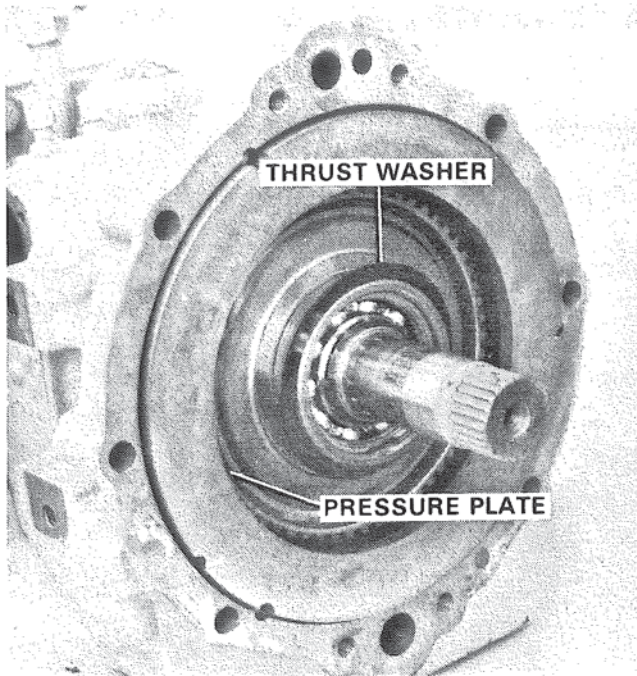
Removing Thrust Washer and Reverse Clutch Pressure Plate.
